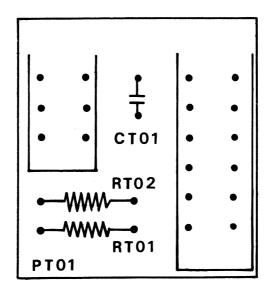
Mono Push Switch Assembly PT01 Component Locations
